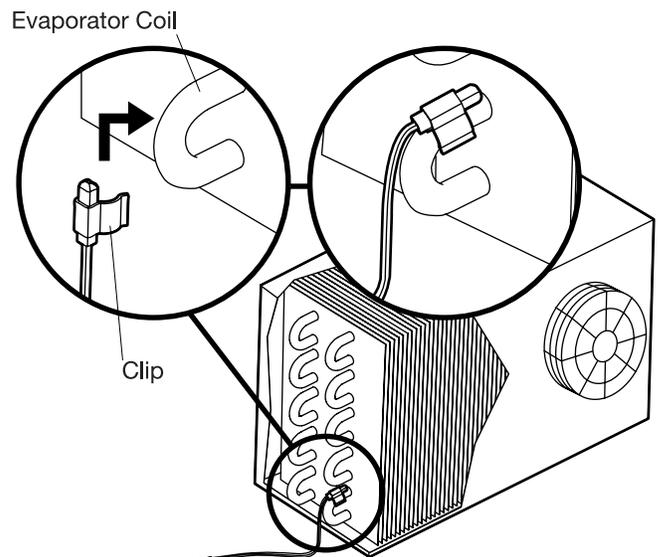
Connect Thermistor Probe to Evaporator Coil
